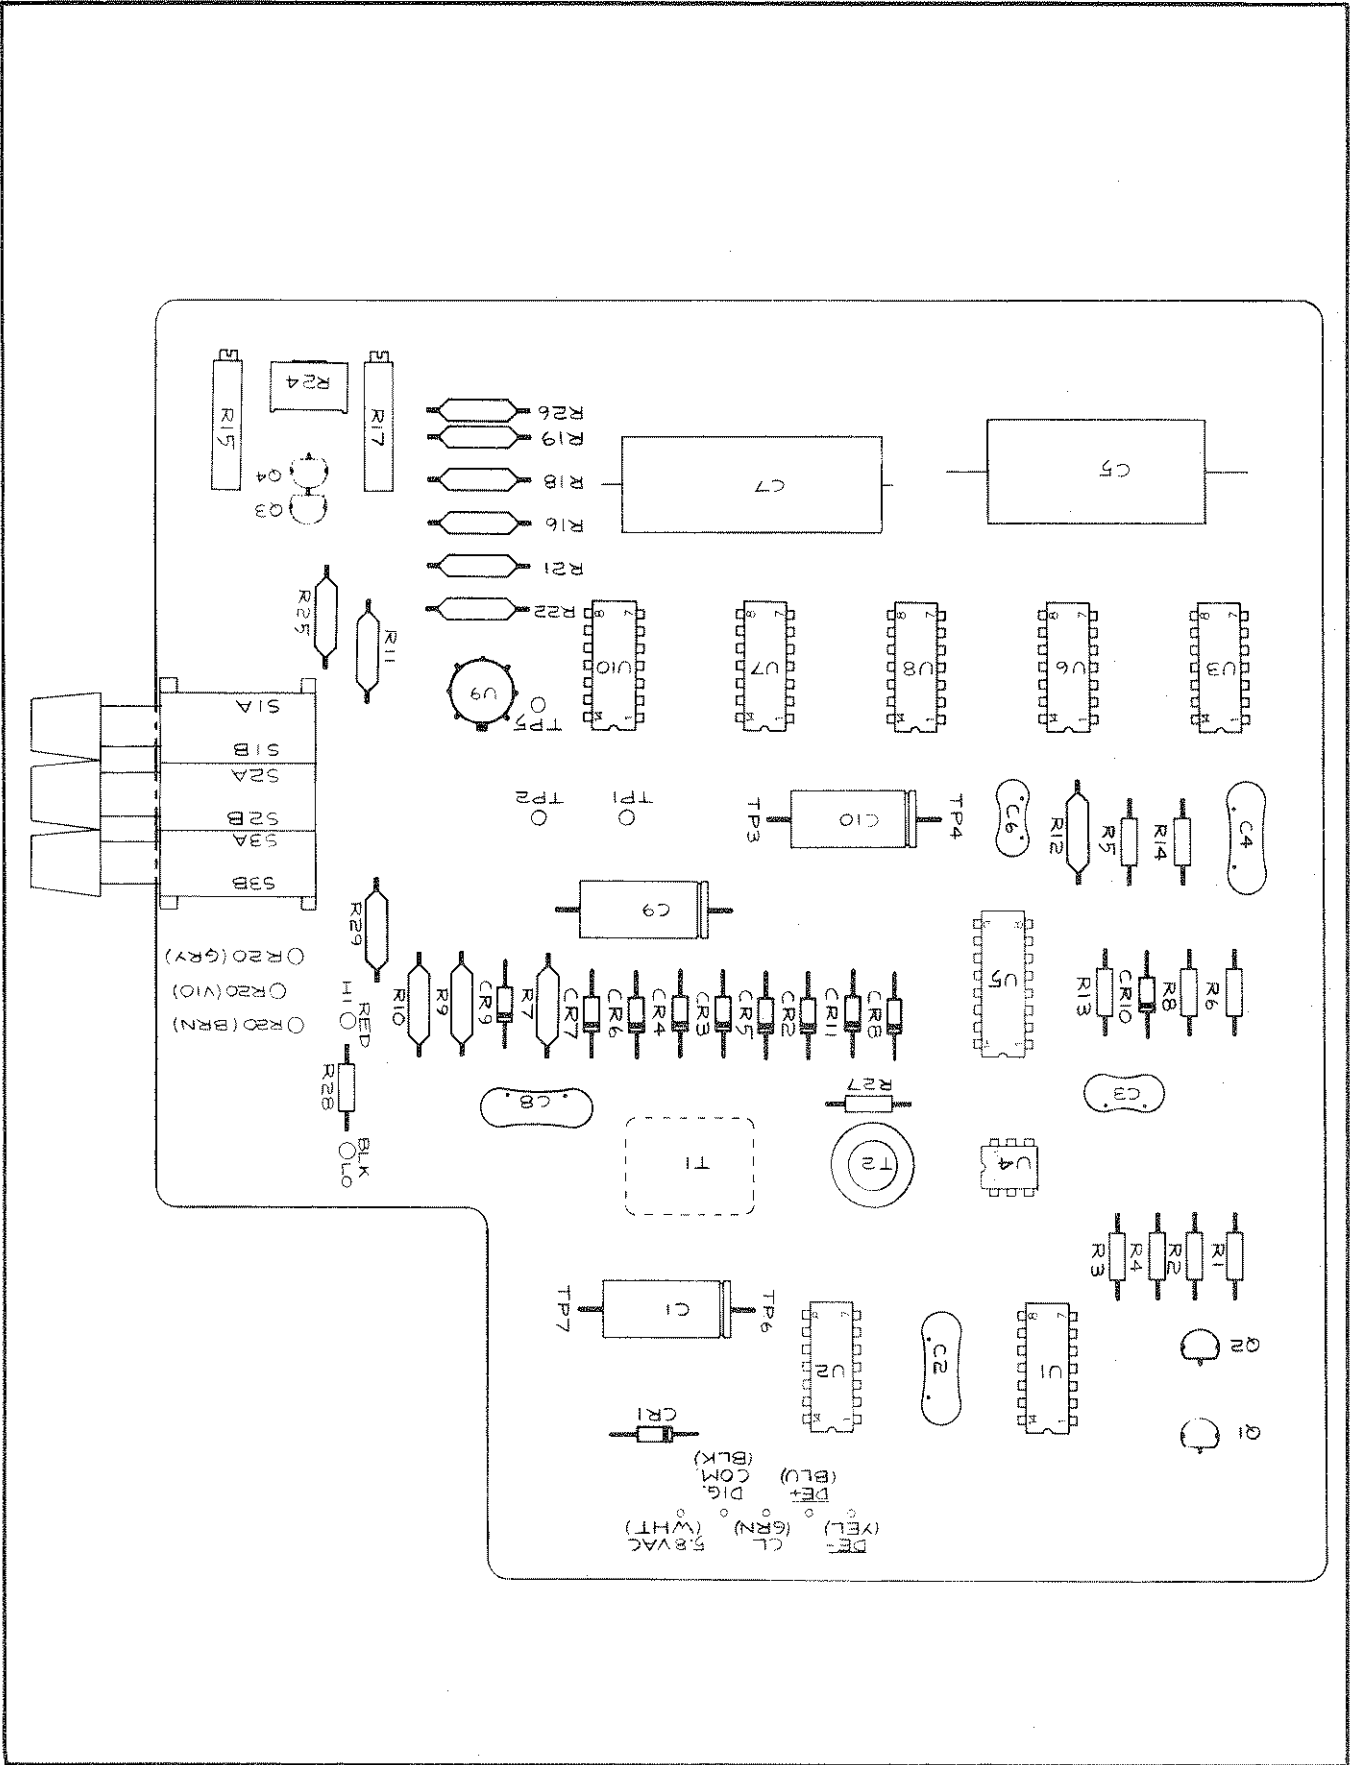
ANALOG OUTPUT UNIT PCB ASSEMBLY.
